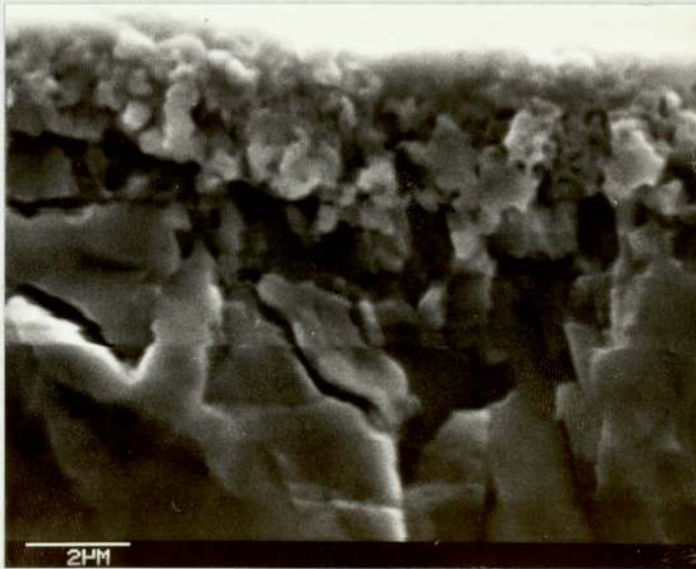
Fatigue fracture in the compound layer at the notch root, nitrocarburised 080M15, root radius 1.52 mm,  $N_i = 646,250$
